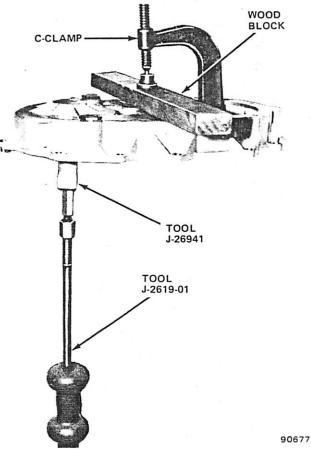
D-29 Front Output Shaft Rear Bearing Removal
